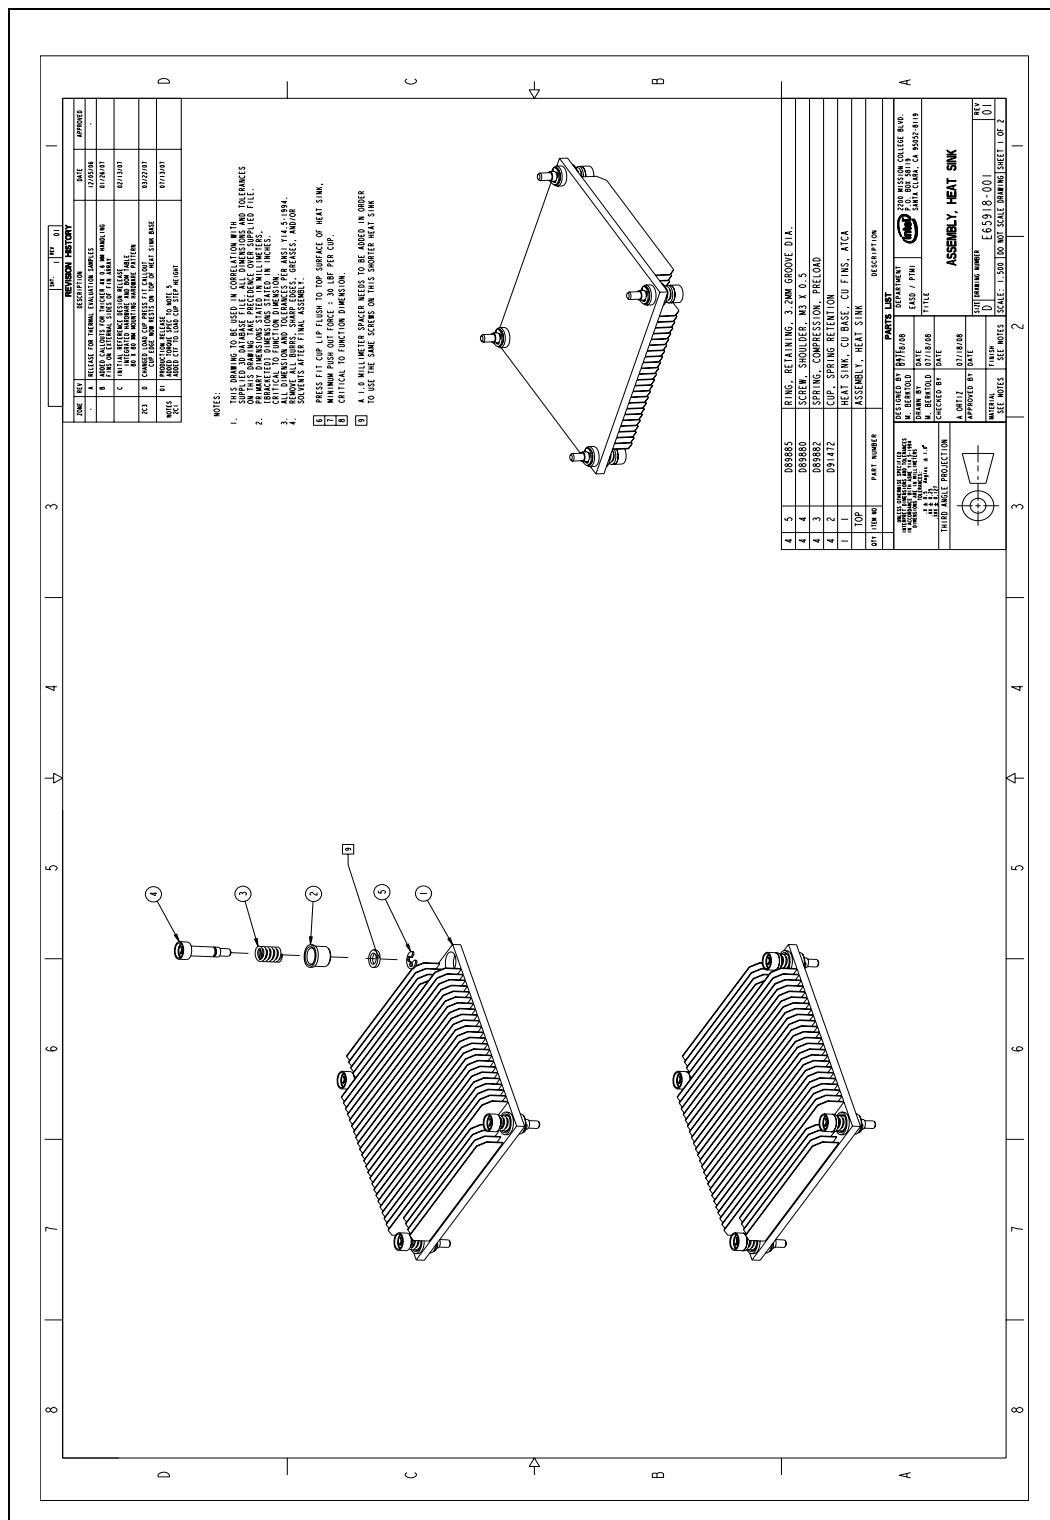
ATCA Reference Heat Sink Assembly (Sheet 2 of 2)
